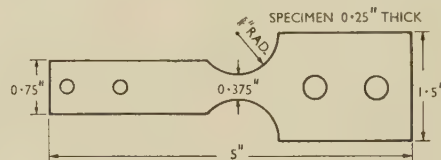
Flat-Type Specimen for Rotating Fatigue Tests.
